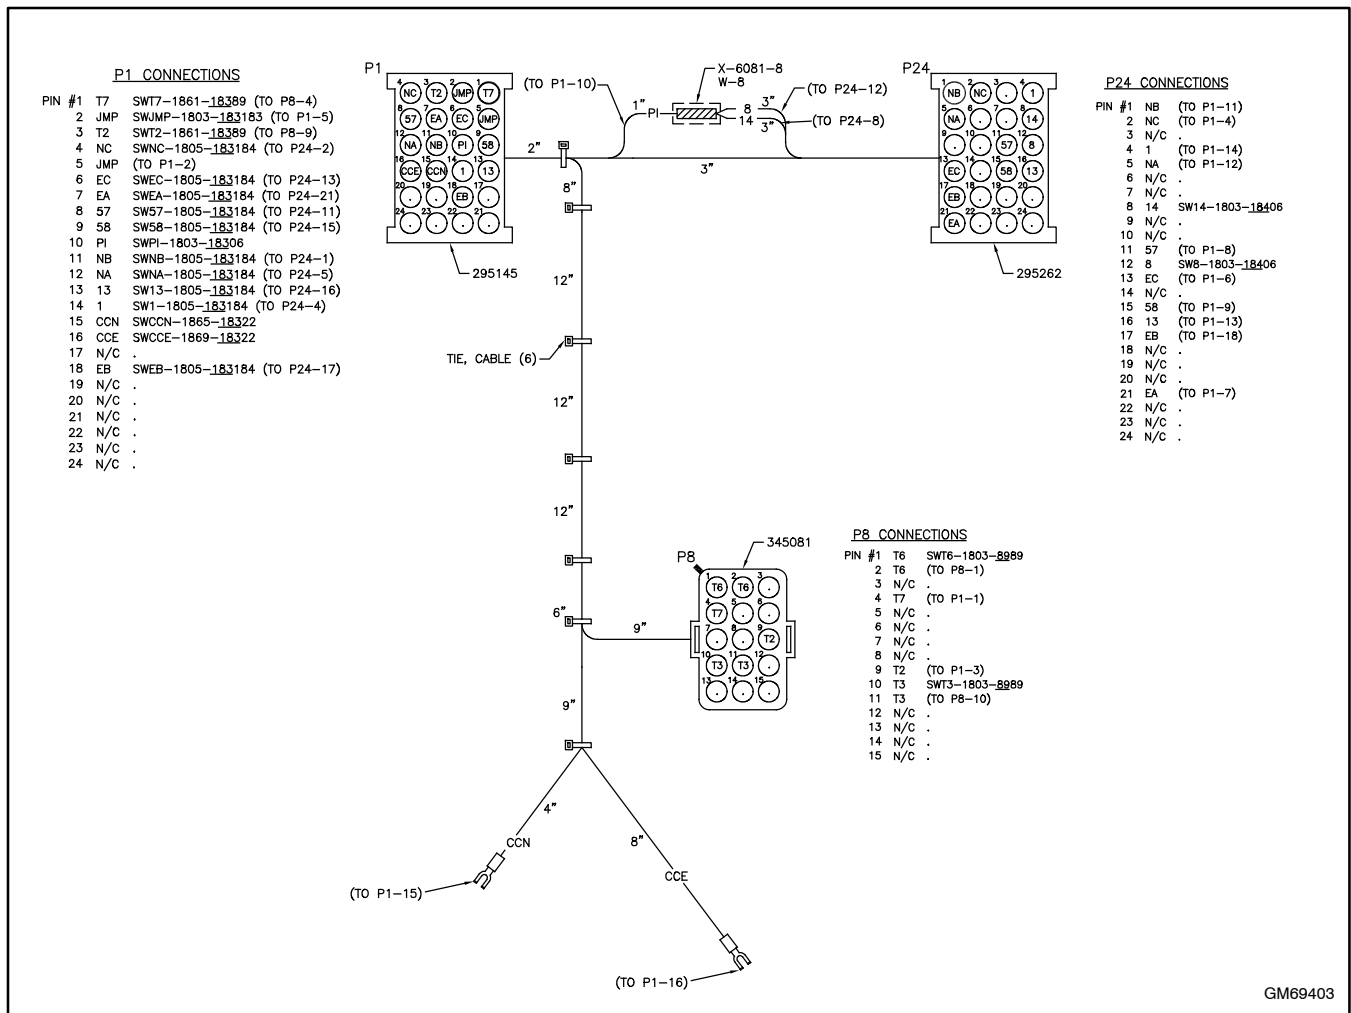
Conversion Kit Harness Connection to Controller Assembly
